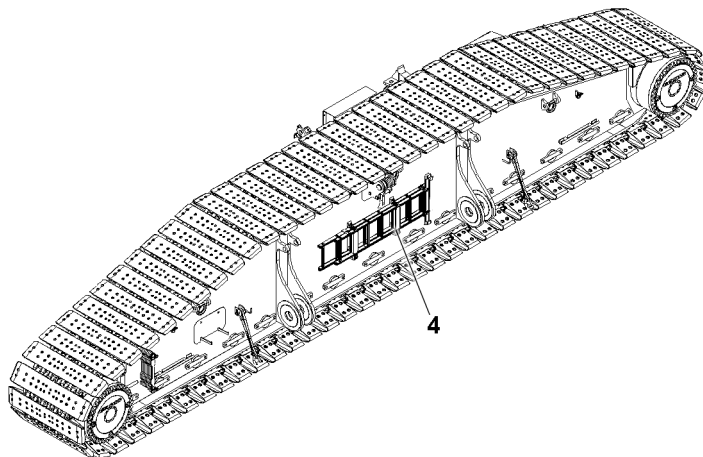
Transport position of the extension ladder 4 on the crawler carrier
